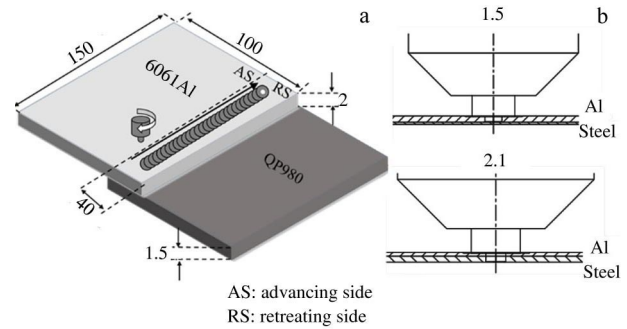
Schematic diagrams of FSW process (a) and welding probes with different lengths (b)
